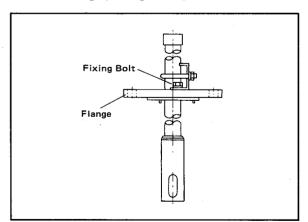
Sensor Holder Removal (Flange Mounting Type).
